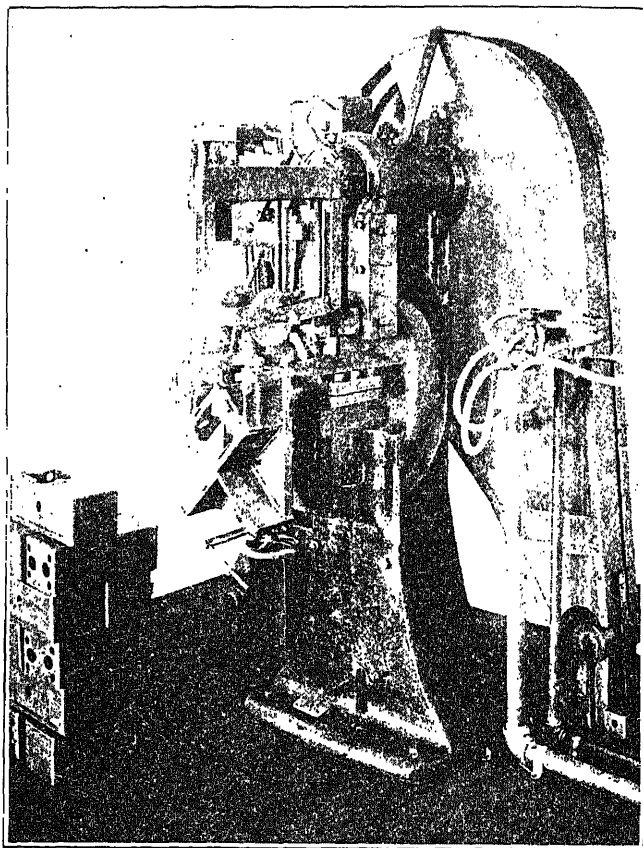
Combination Spot- and Line-Welding Machine, Set Up for Line-Welding Can Seams.
